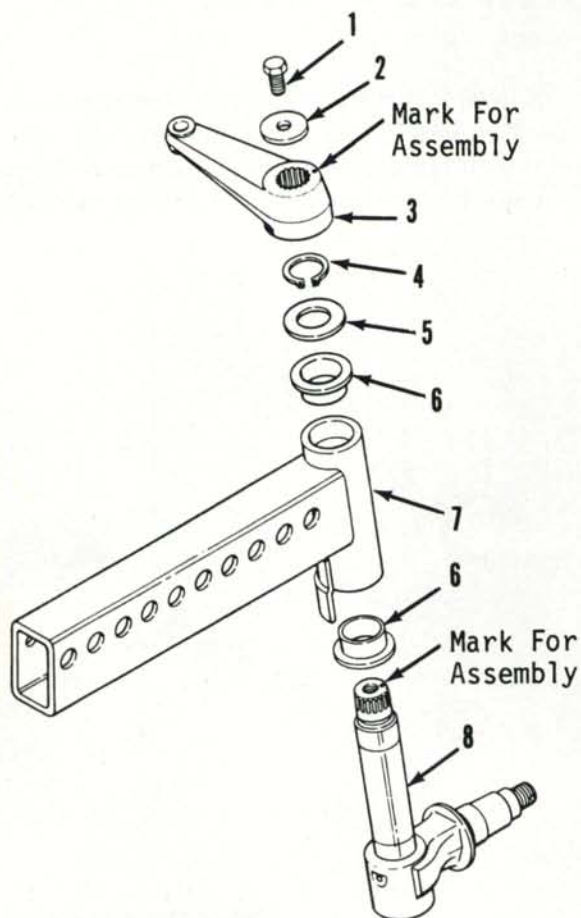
Exploded view of steering spindle used on all two-wheel drive tractors. Note assembly marks.
